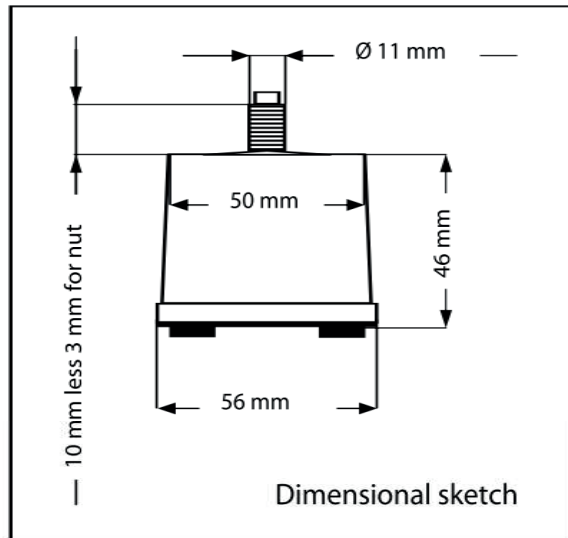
Rán Rotary Switch dimensions - (all measurements in mm)
